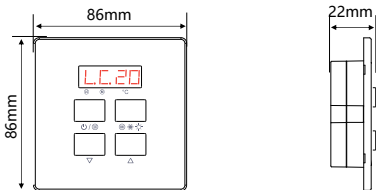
Dimensions - Front View Figure 3. Dimensions - Side View
